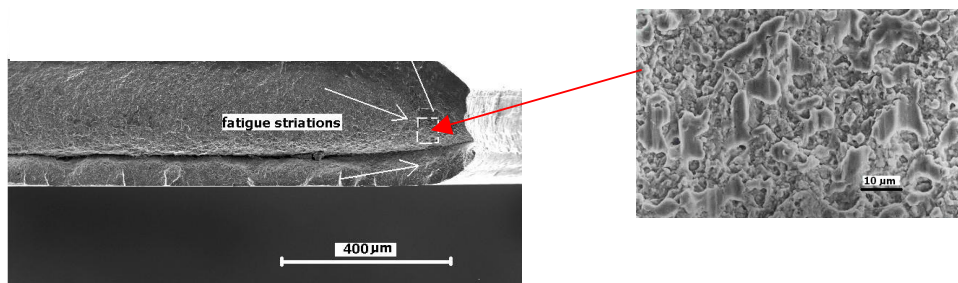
Fracture surface microscopy of the blanked valve.
